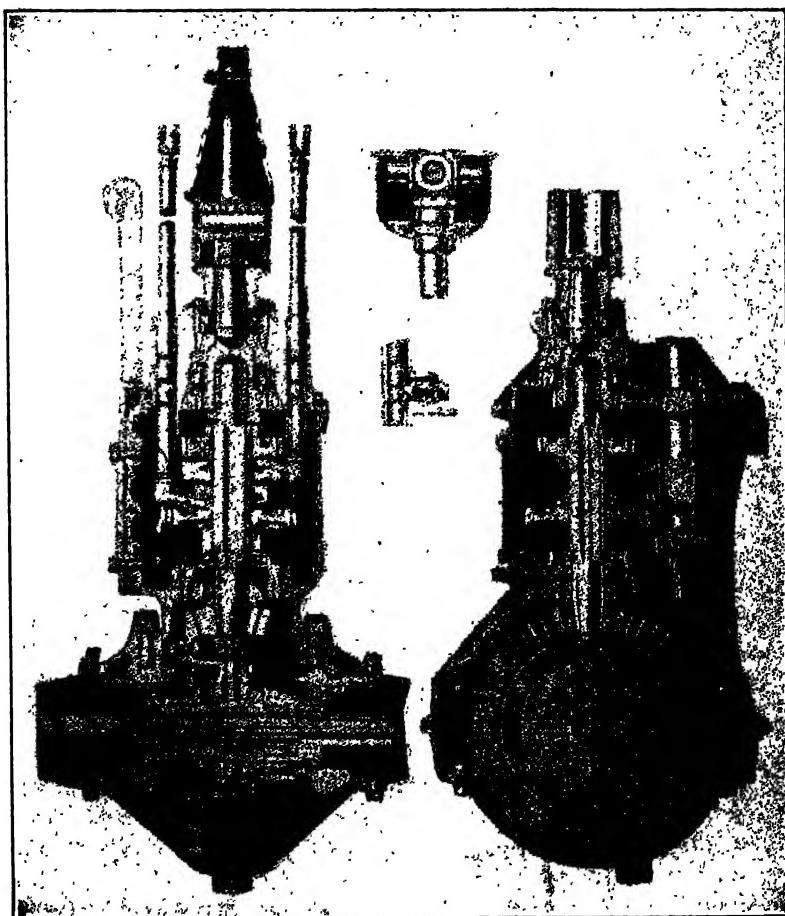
Showing Application of Three Speed Sliding Gearset to Studebaker Rear Axle.
